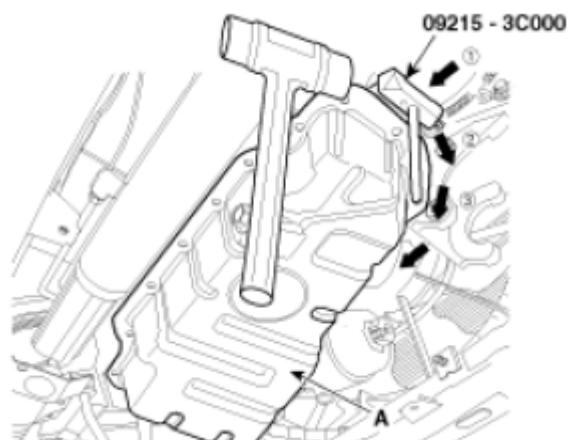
Cutting Sealer To Remove Lower Oil Pan
